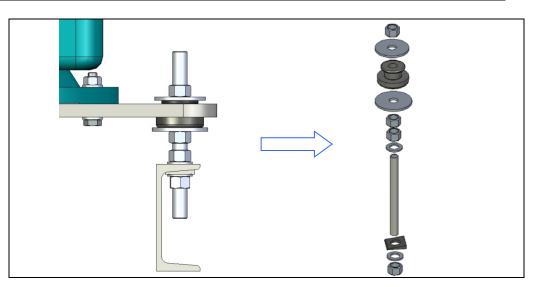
Fastening set for mounting plate/bridge, for use on steel bridge
